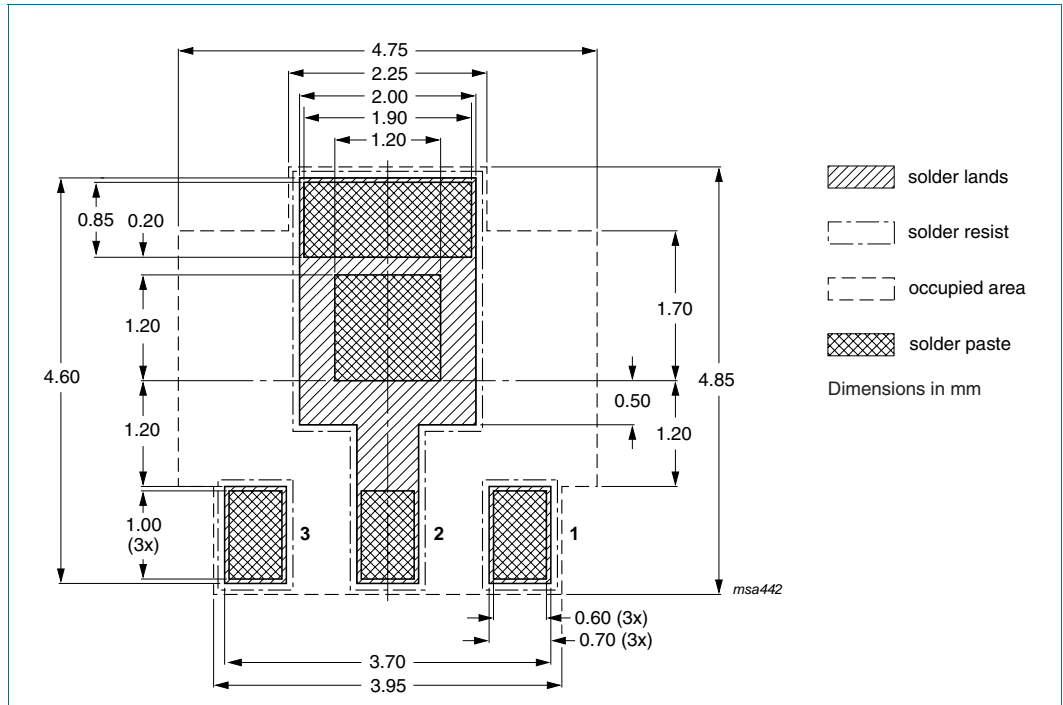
Reflow soldering footprint SOT89 (SC-62)
